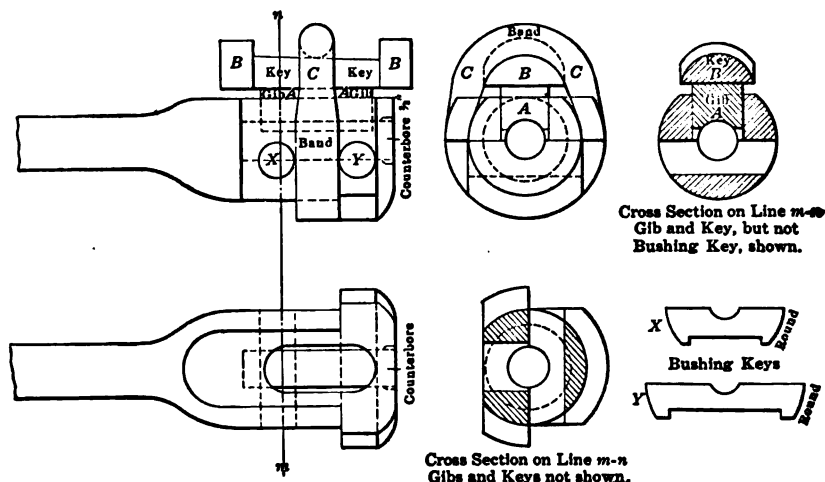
NORTH STAR BOLTLESS CHUCK FOR PISTON DRILLS.
